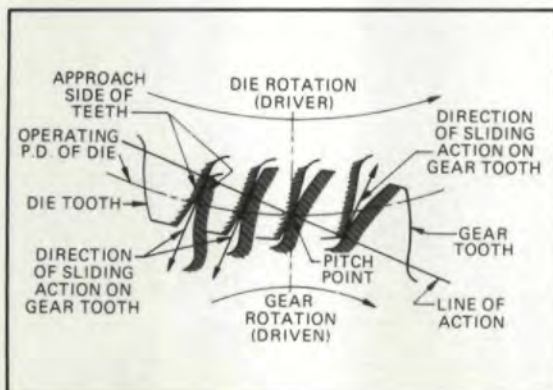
(left)—Contact action between one tooth of a workpiece and the approach side of a rolling die tooth.
